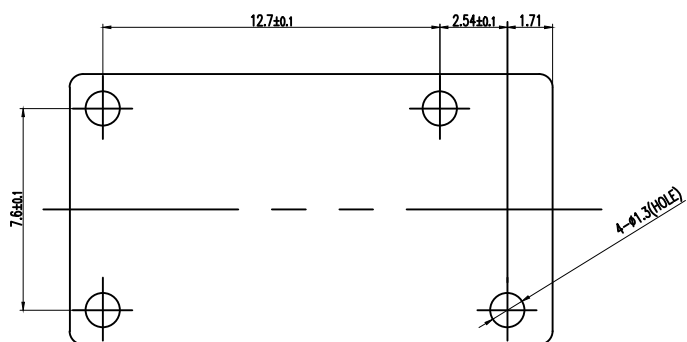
FIGURE FOR PRINTED CIRCUIT BOARD PROCESSING (BOTTOM VIEW)
